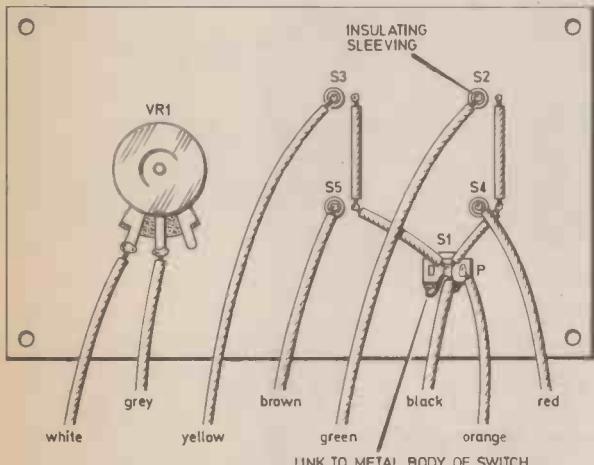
Front Panel wiring. Note that one pin of each push-button is fitted with an insulating sleeve.
